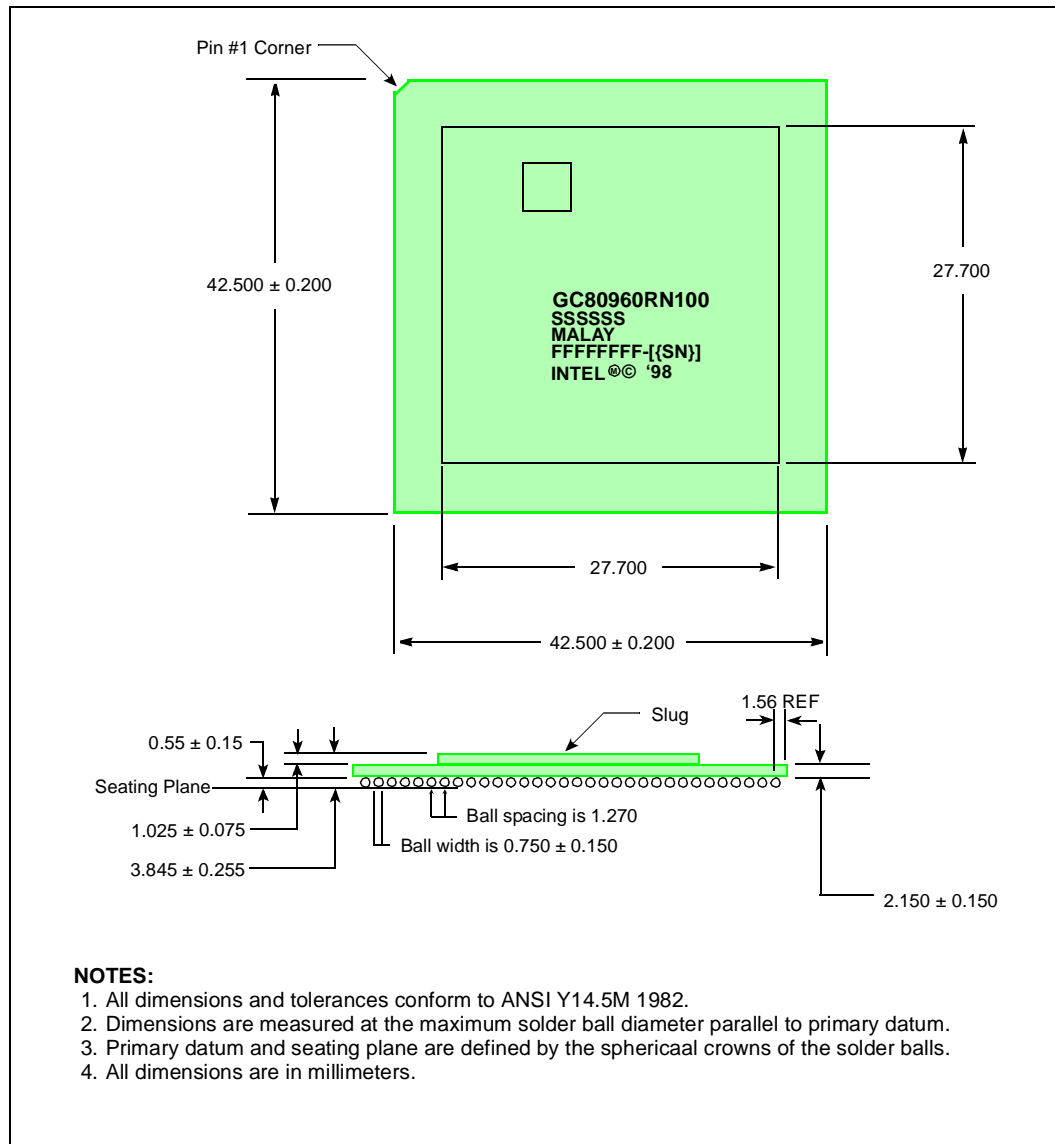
540L H-PBGA Package Diagram (Bottom View)
